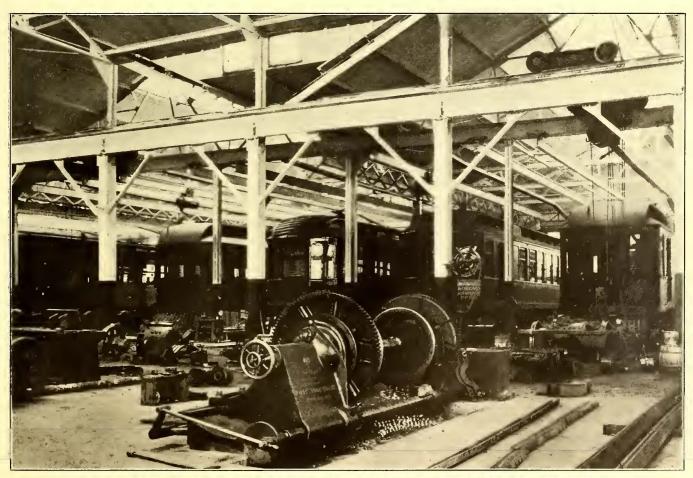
TRUNK AISLE AND REPAIR PITS, SHOWING TRAVELING BRIDGE AND MOVABLE HOISTS
